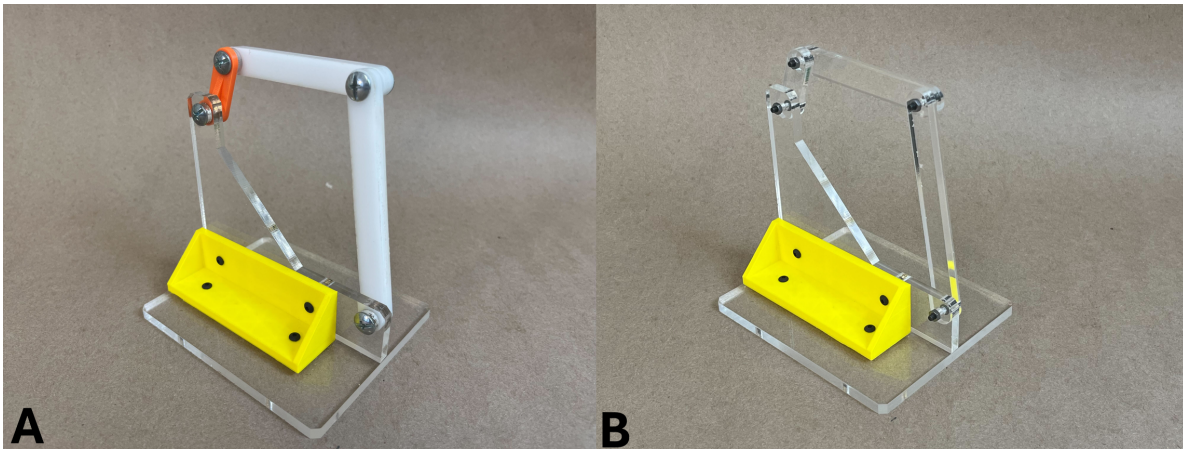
Linkage assembly task with well designed linkage (A) and poorly designed linkage (B)
